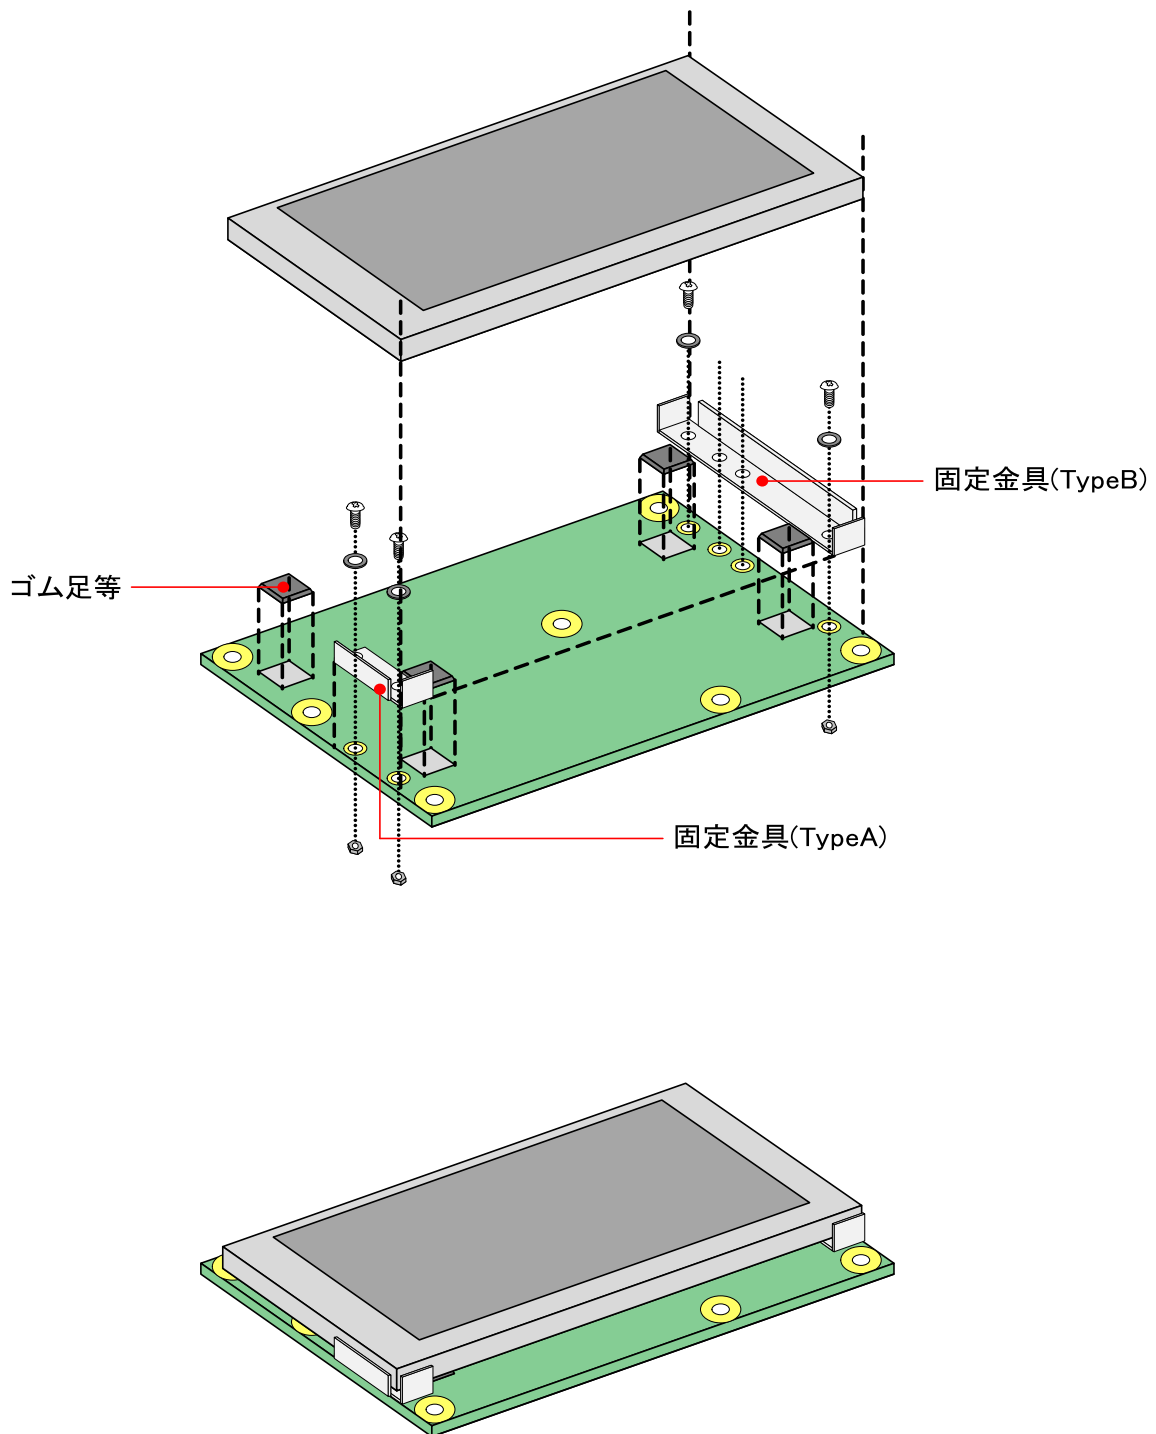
LCD Metal Fittings Assembly Example for LCD Expansion Board (Product Revision B)
